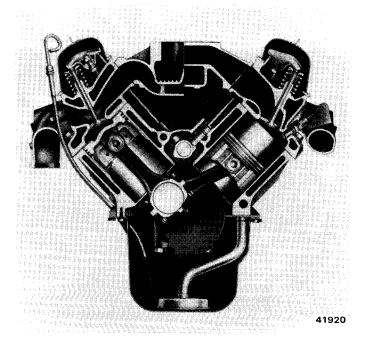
B-1 Sectional View of V-8 Engine Assembly
